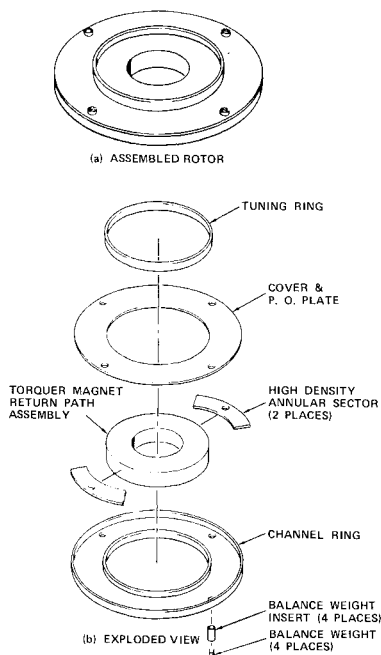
DTAG feasibility rotor: a) assembled rotor; b) exploded view.
